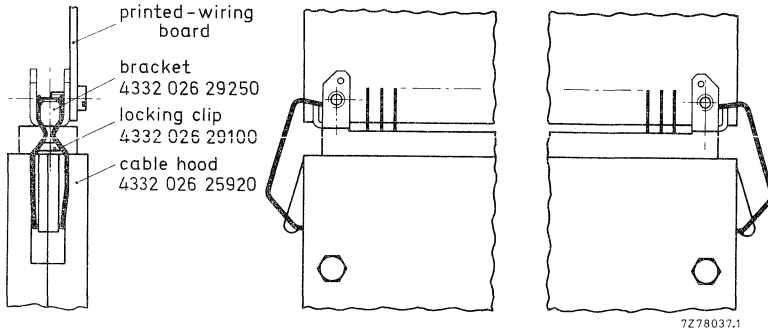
Mounting of a female part to a board with bracket having locking facility.
